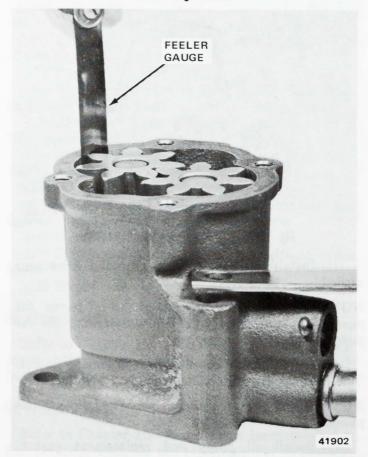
B-97 Oil Gear-to-Body Clearance Measurement
